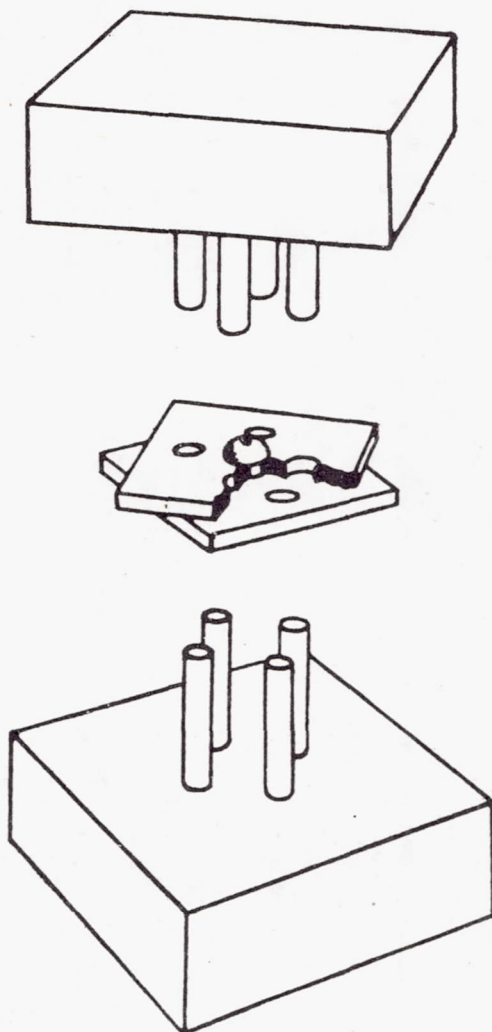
~ Fixtures and specimen for rivet tension tests.
